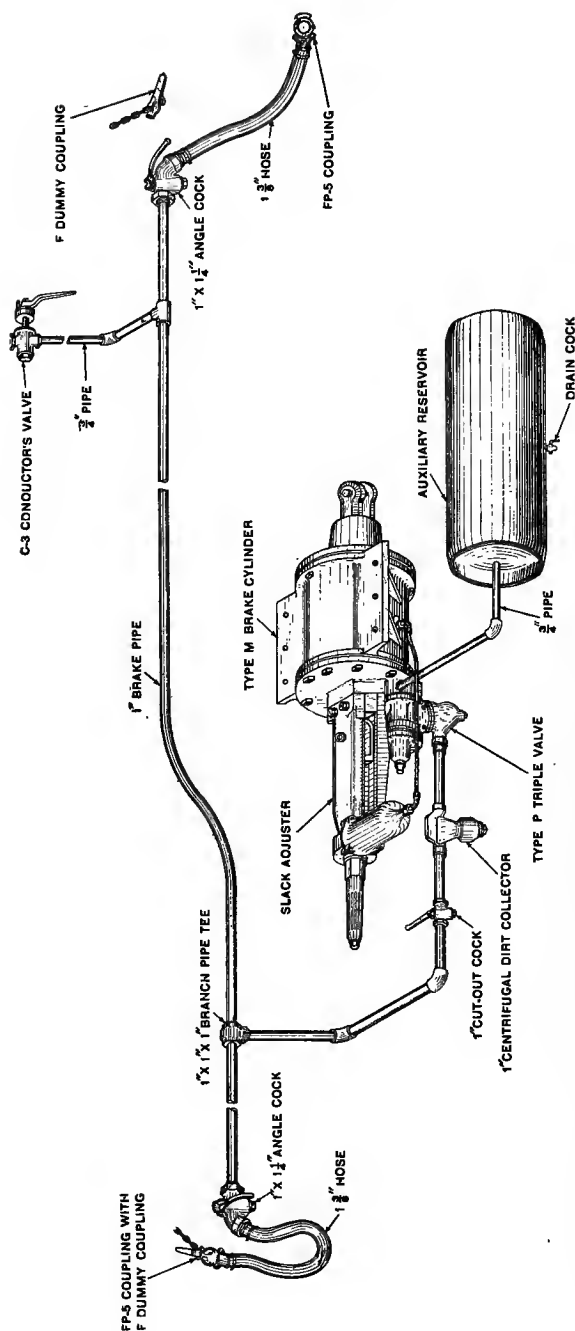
QUICK ACTION AUTOMATIC BRAKE (STANDARD PM EQUIPMENT)
